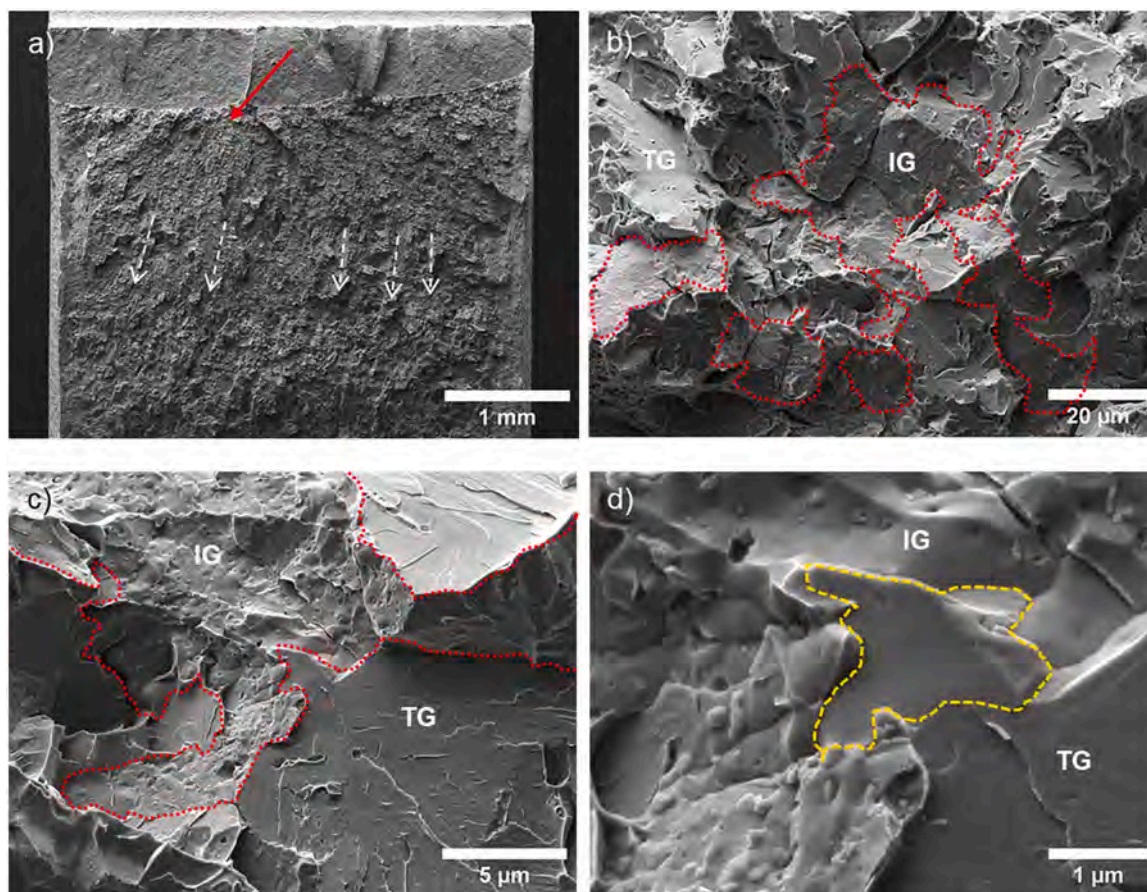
Fracture surface and initiation site of a high-fluence SGW mini-C(T) specimen. (a) Primary initiation is indicated and further the as-welded columnar structure can be observed from the fracture appearance. (b, c) A large area of IG cracking is surrounded by TG cracking. (d) The cleavage fracture has initiated from a Mn-rich particle outlined in the figure.
